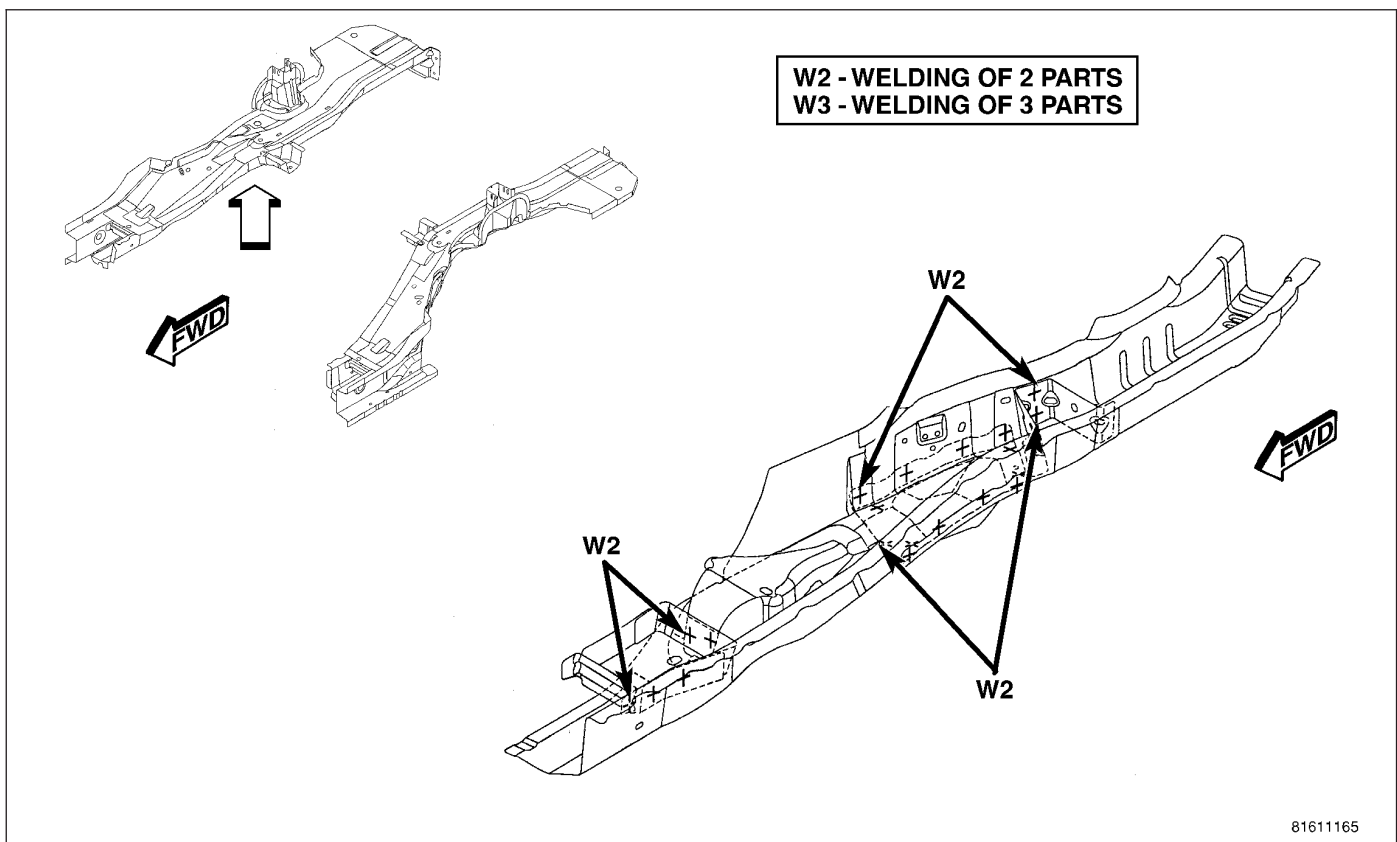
SIDEMEMBER ASSEMBLY (4 OF 17)
